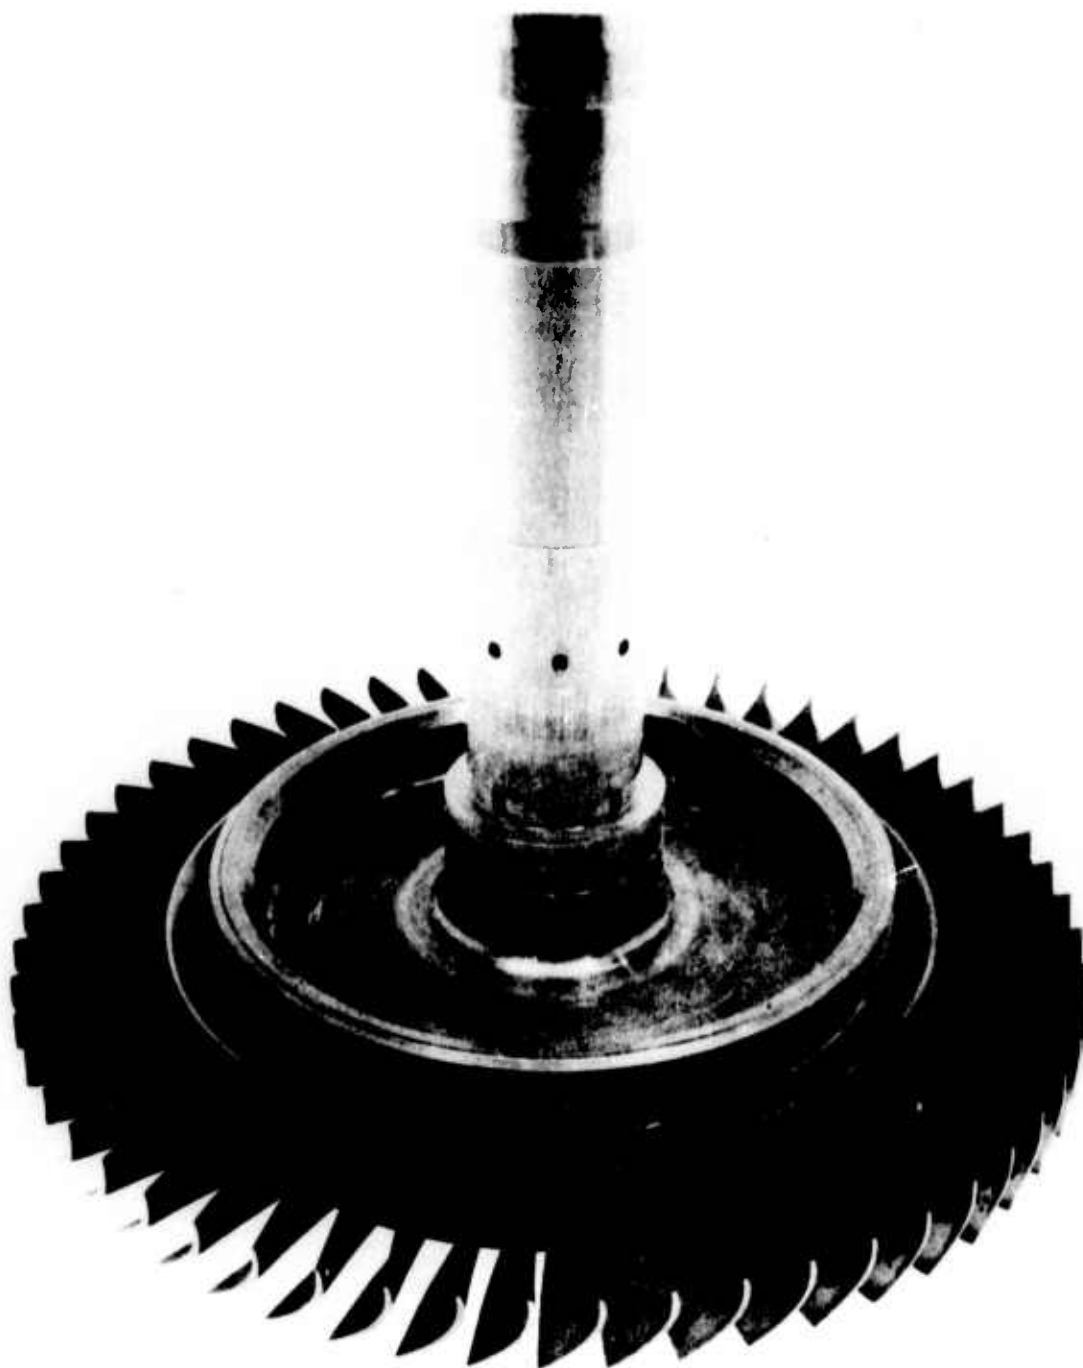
Enlarged Cooling Air Holes in Turbine Shaft.
